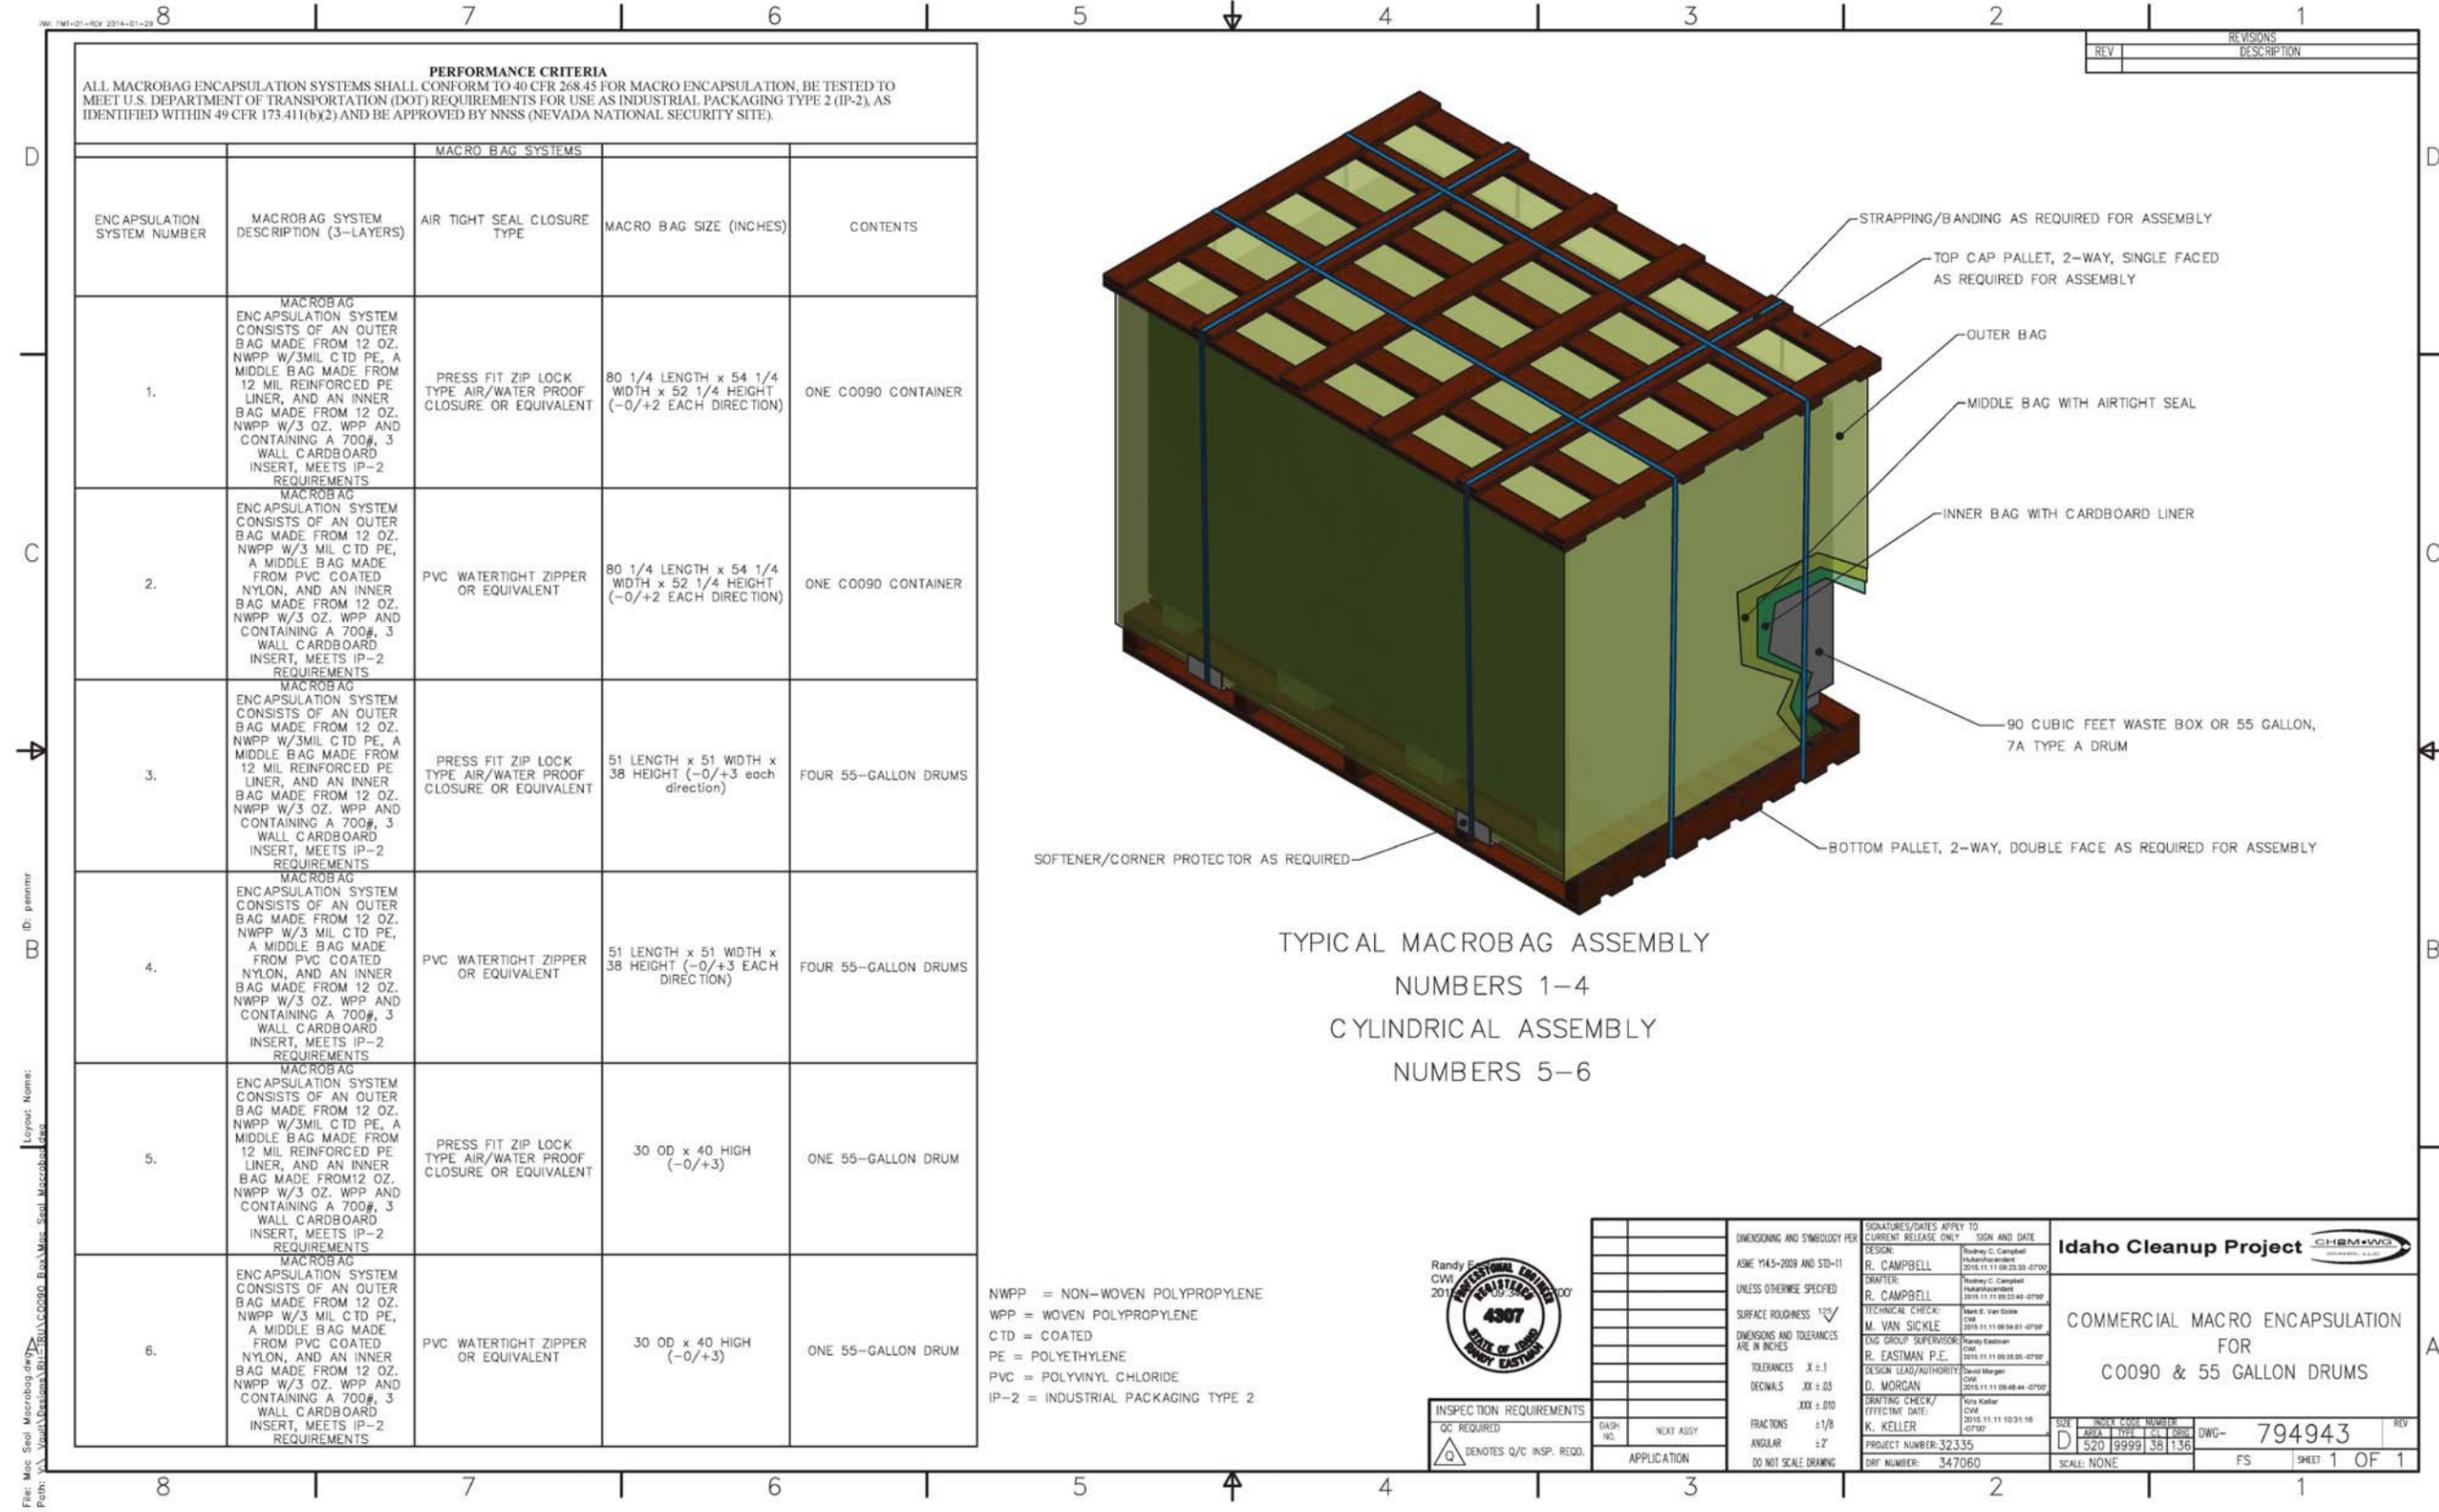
Example drawing of Commercial Macroencapsulation Bag
